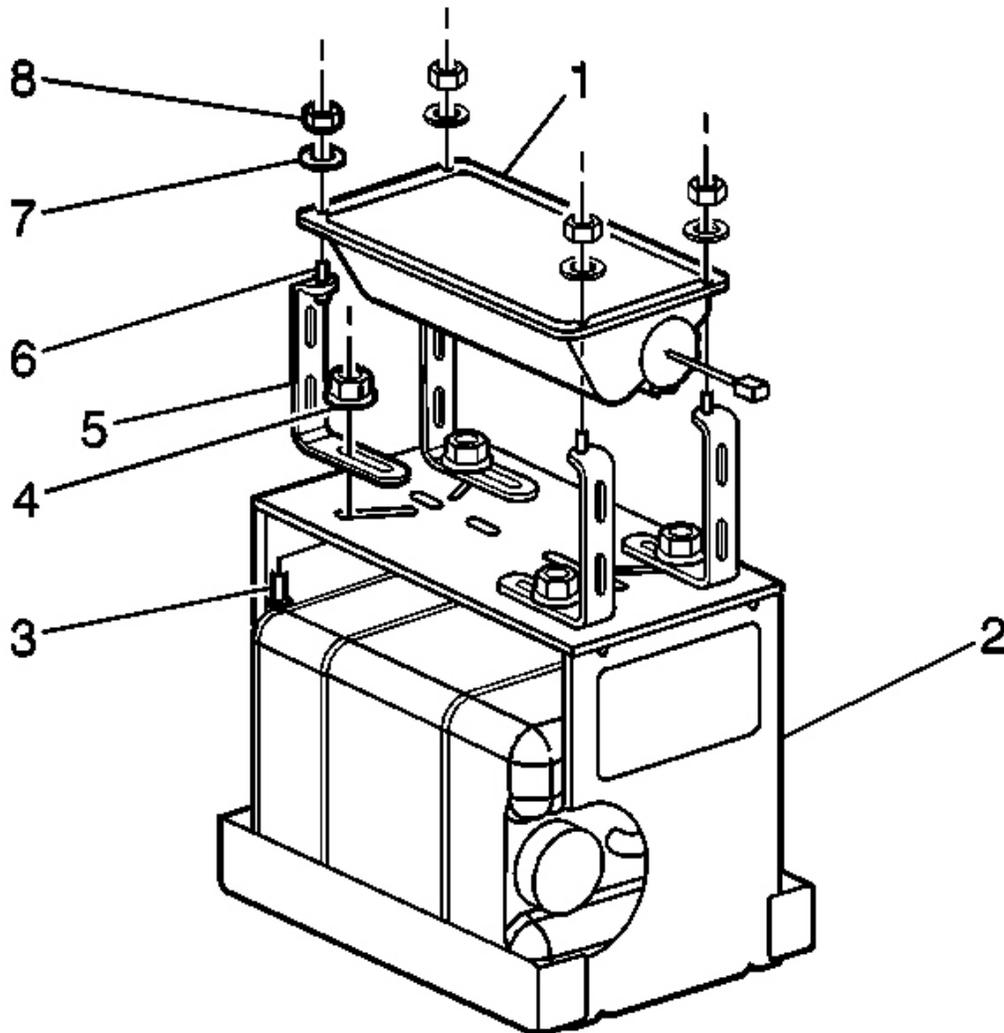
Identifying Clearance For Deployment Of Inflator Module
